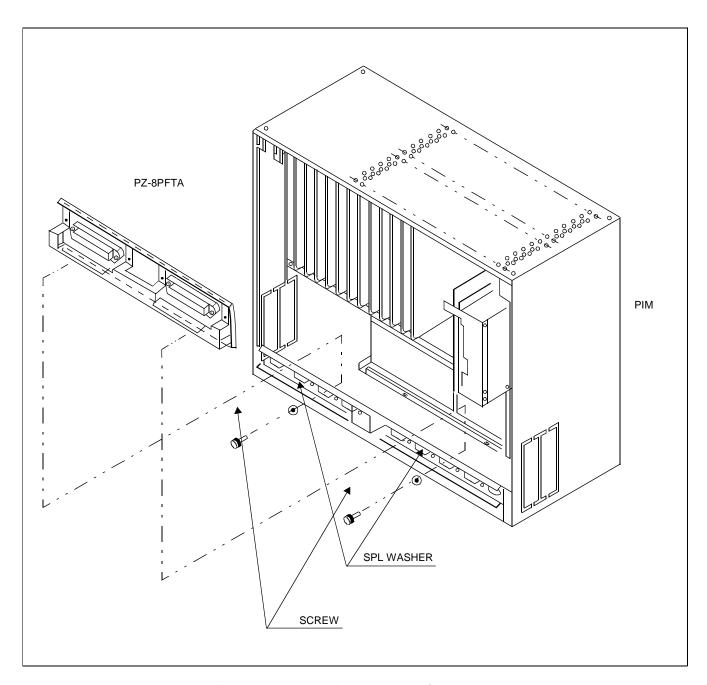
Mounting PZ-8PFTA Card to PIM
